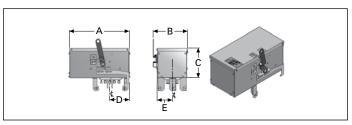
Circuit Breaker Plug-In Unit Dimensions Table 24.2-8. Breaker Plug-In Unit Dimensions
